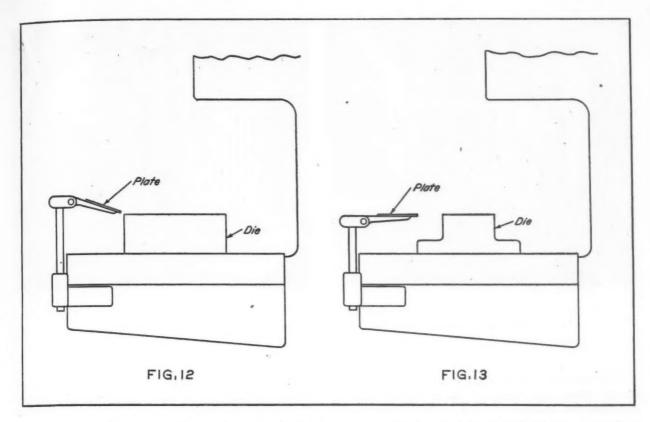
Guard Plate Must Not be Pointing Downward instead of being Horizontal. Fig. 13. There Must Not be a Wide Space between the Guard Plate and the Die
